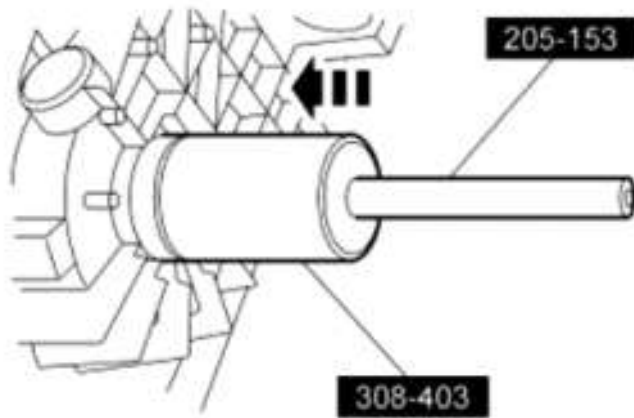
Removing Front Output Seal Using Slide Hammer With Torque Converter Oil Seal Remover
